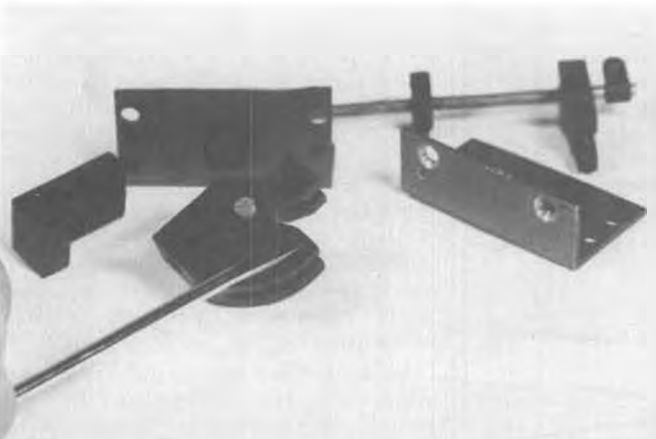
Screwdriver blade points to area to be cut for proper locking.
